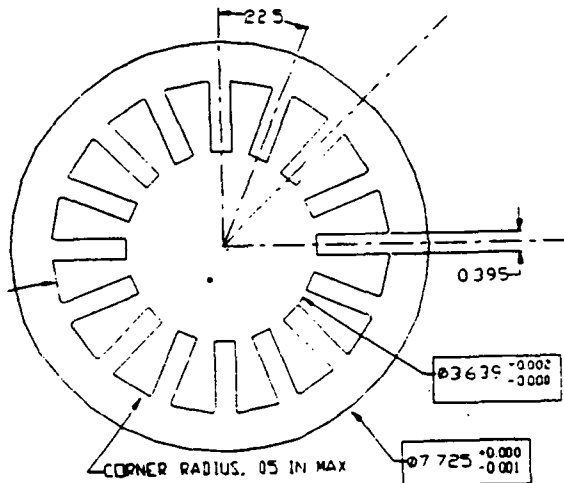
16 Pole Radial Bearing Stator S2 Geometry
